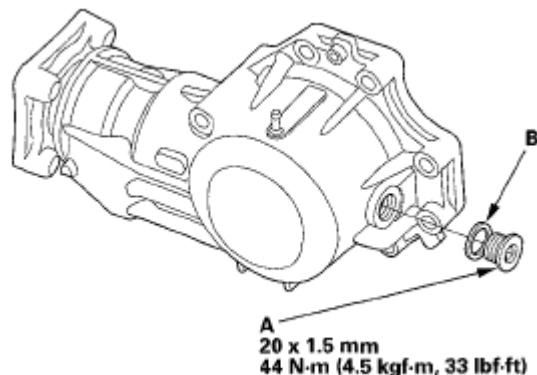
Identifying Filler Plug And Sealing Washer With Torque Specification
